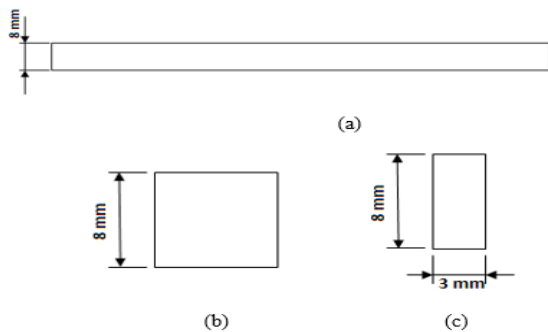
The workpiece (a) before machining, (b) and (c) after machining
